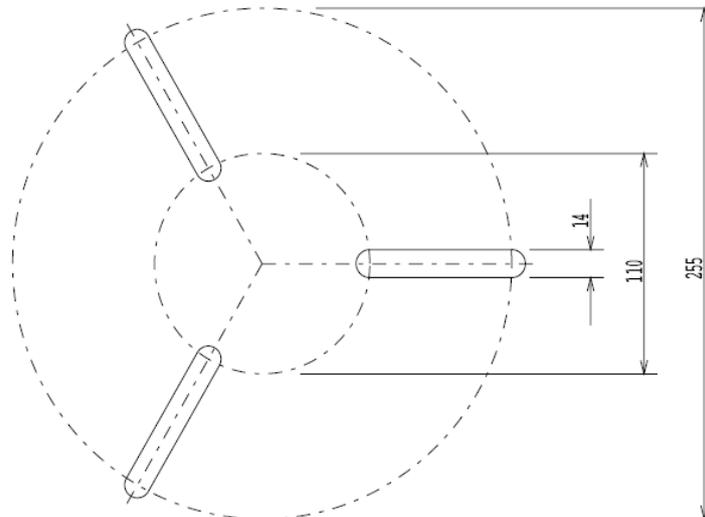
Drilling plan for surge arrester base mounting (66 kV, 88kV and 132 kV arresters)
